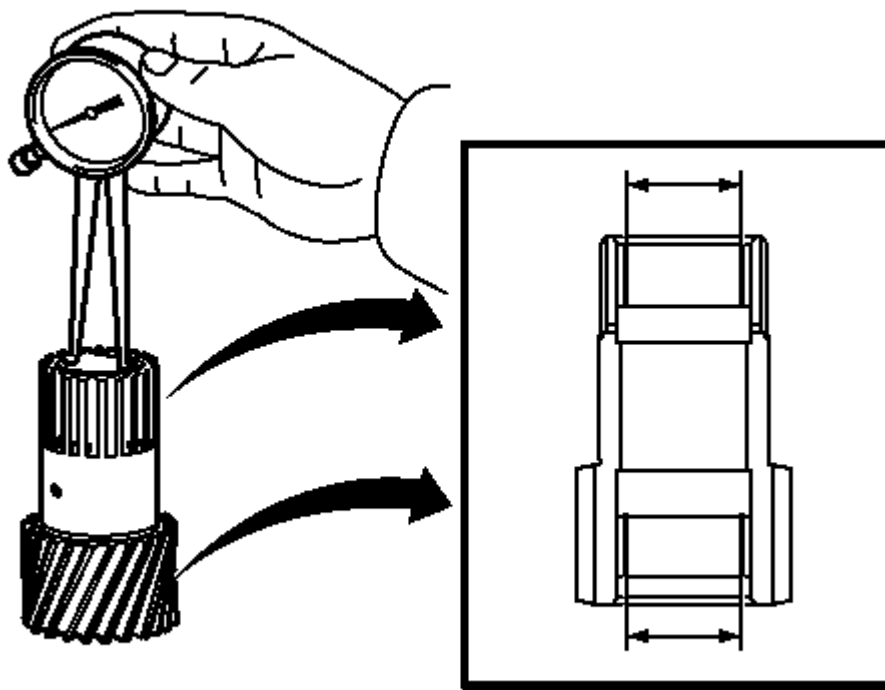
Measuring Inside Diameter Of Front Planetary Sun Gear Bushing Using A Dial Indicator
